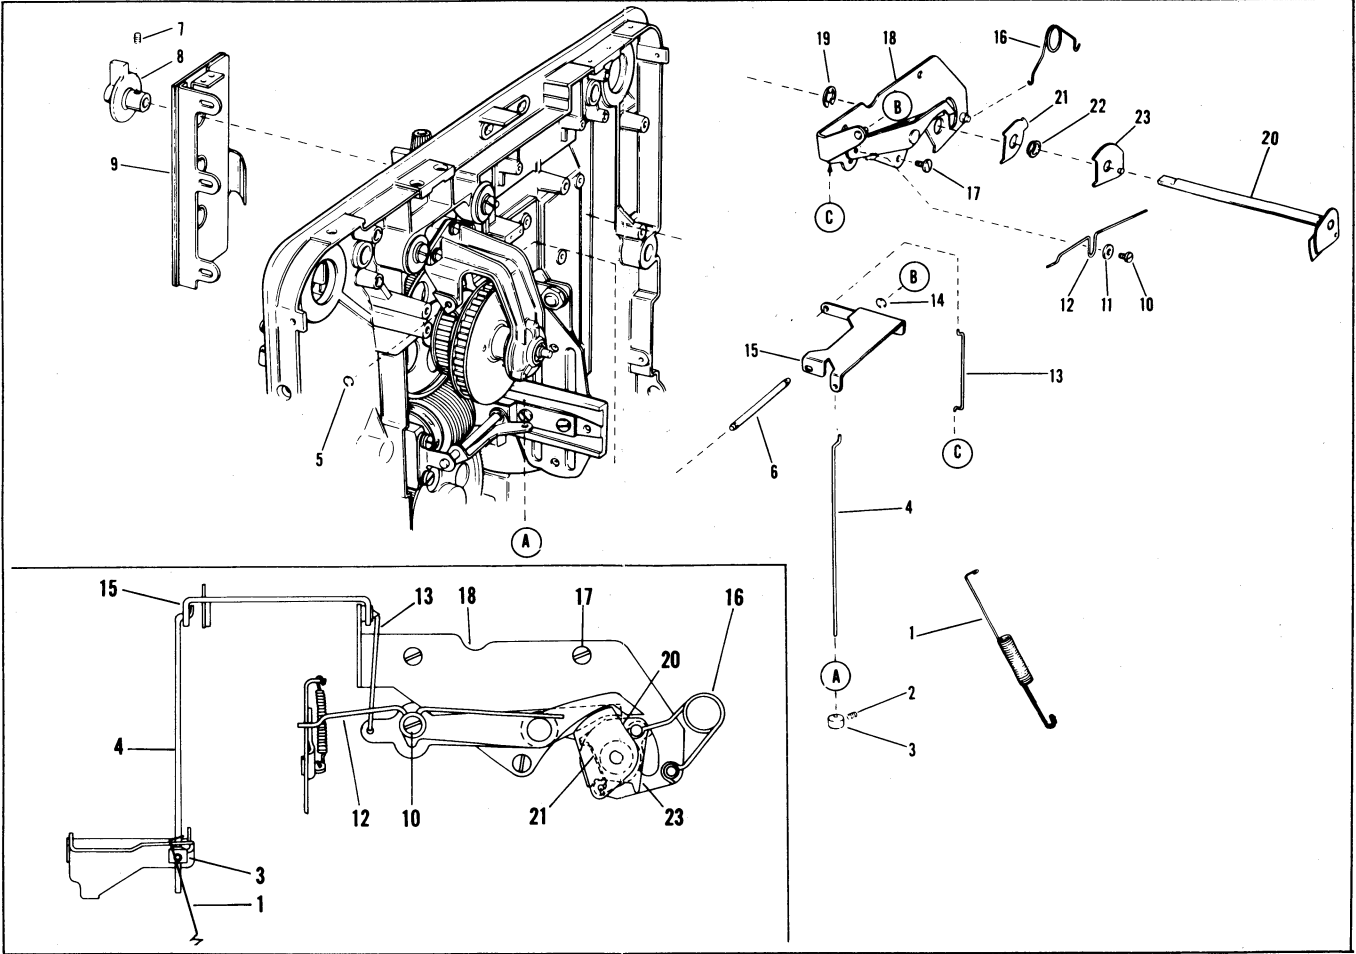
Mechanically Operated Clutch and Fire Shutter (542 and 542EX Only)
